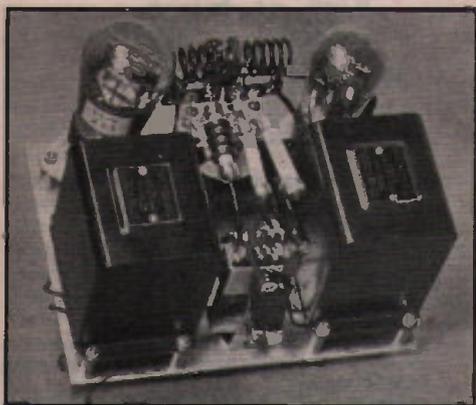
ILLUSTRATING THE ASSEMBLY OF EQUIPMENT ON THE BACK OF THE PANEL
